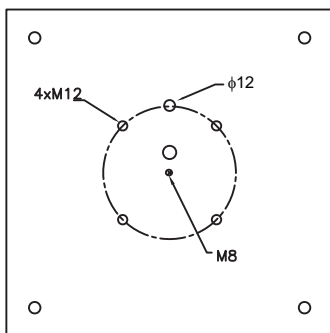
Boom Mounting Plate (5 mounting holes for pedestal fixing)
